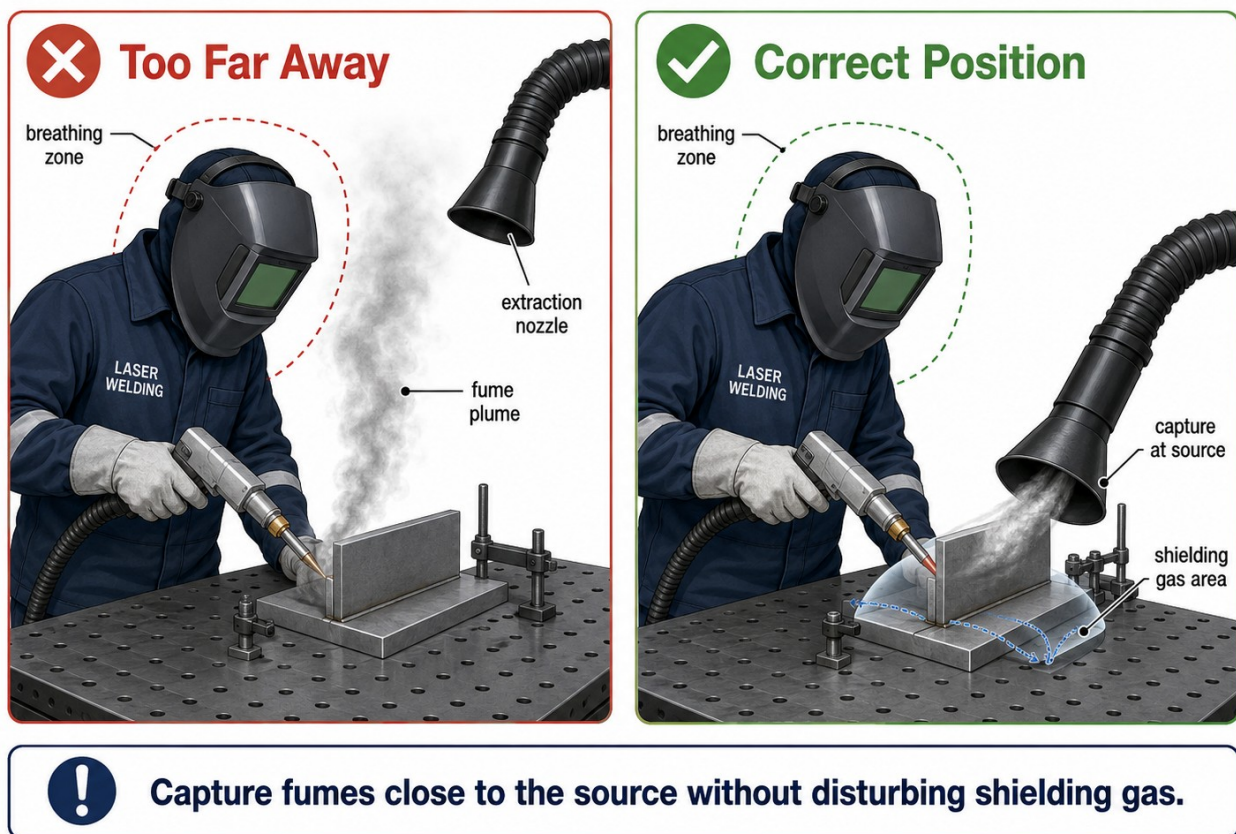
Local exhaust should capture the fume near its source without pulling shielding gas away from the weld.
